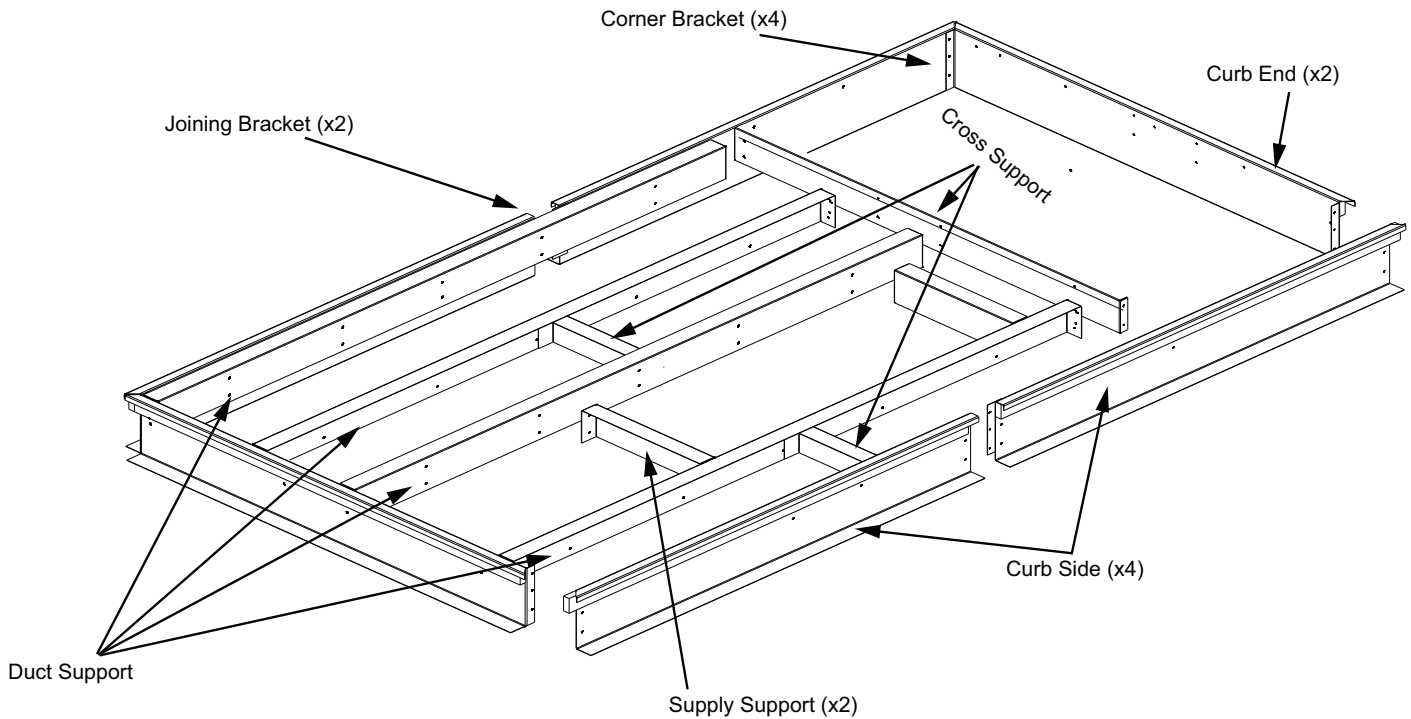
CRRFCURB005A00 Roof Curb Dimensions — Typical Exploded View
